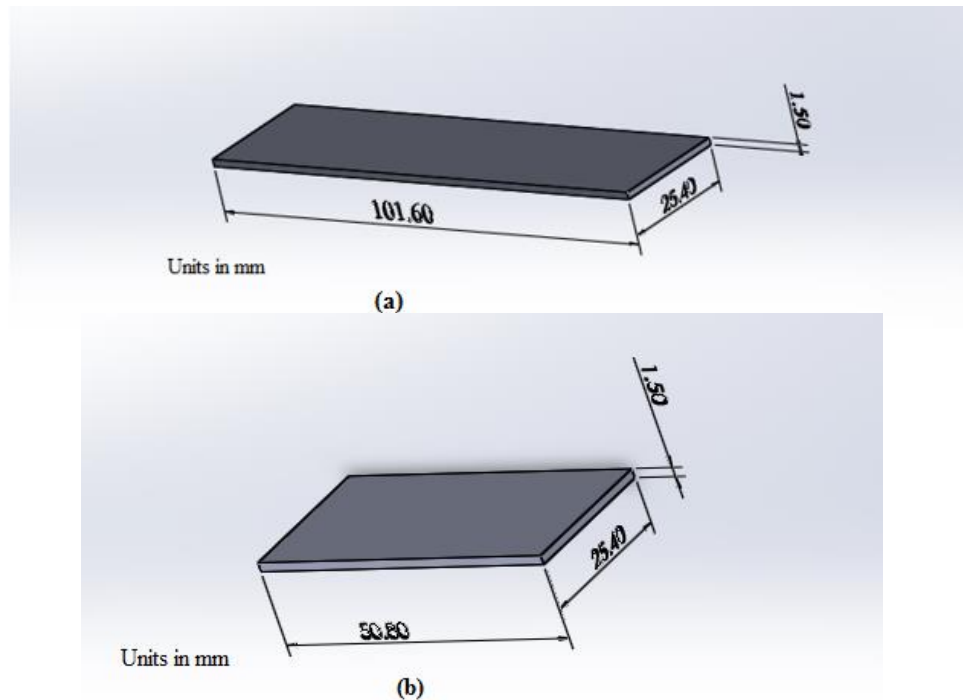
Aluminium adherends dimensions, a) 4in Long strip, b) 2in long strip
